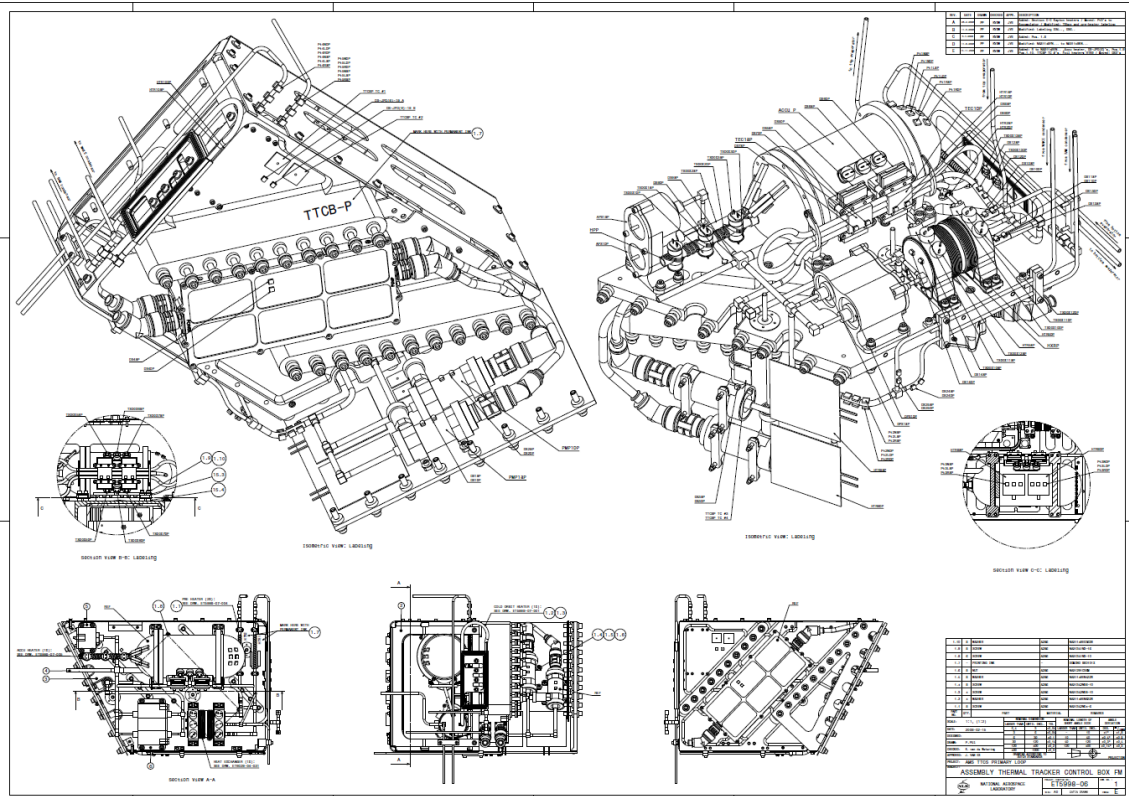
TTCB-P box assembly (NLR detailed design)
